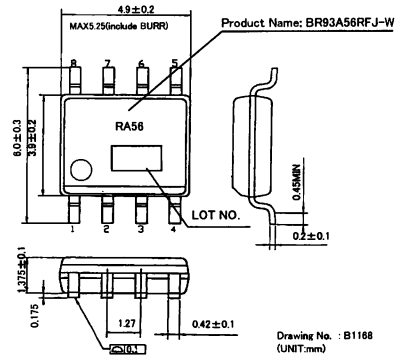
(d) PHYSICAL DIMENSION SOP-J8 (BR93A56RFJ-W)
